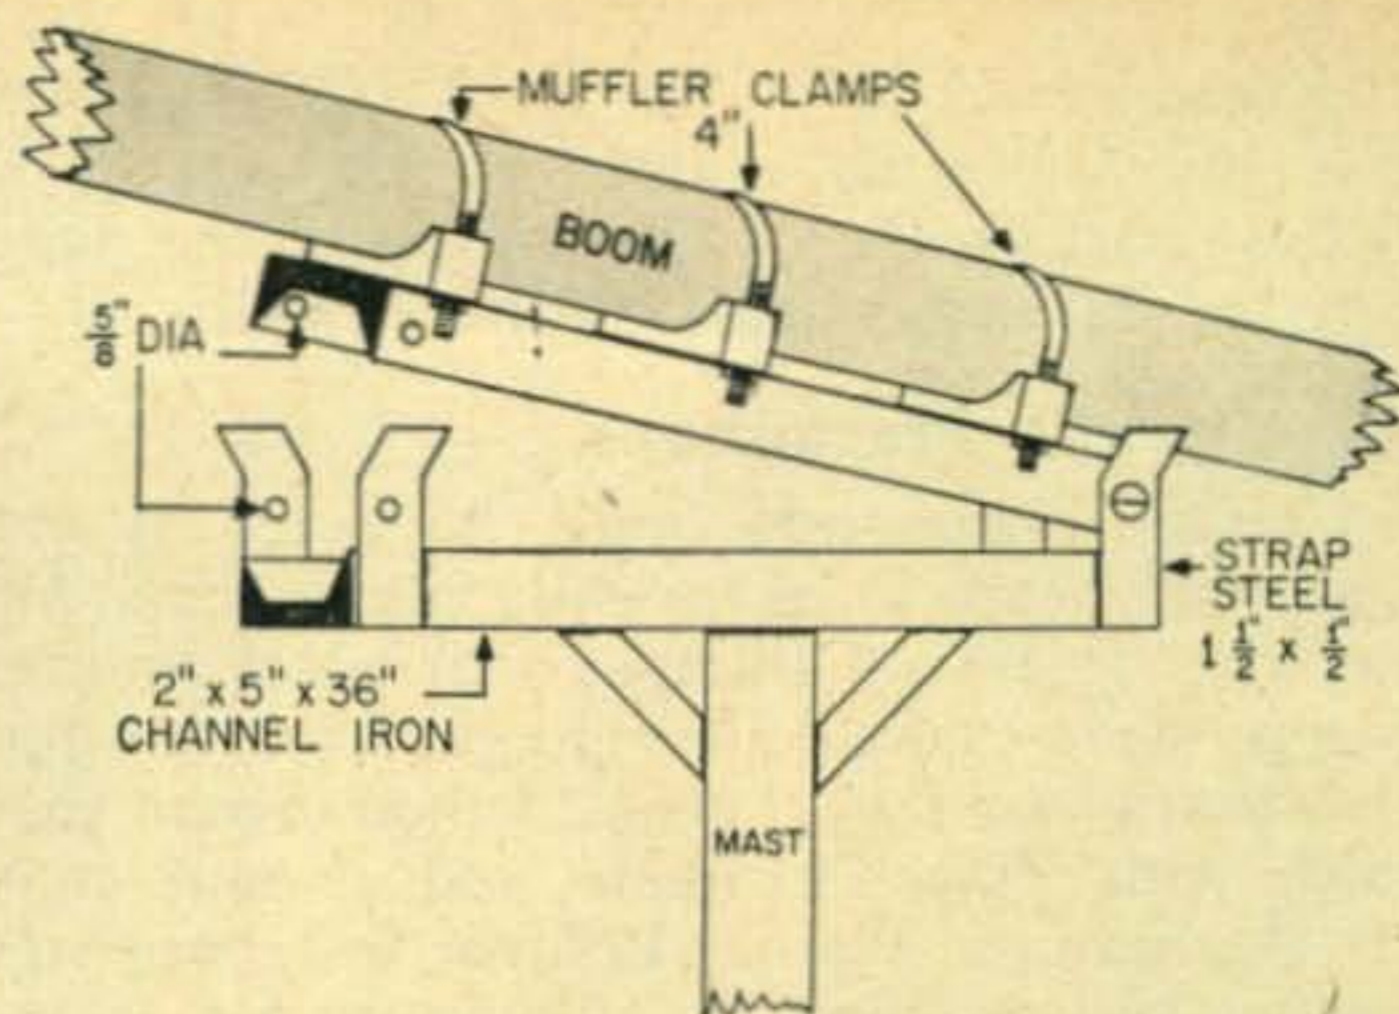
Methods of adapting the boom to a tilthead mast. All joints are securely welded.
